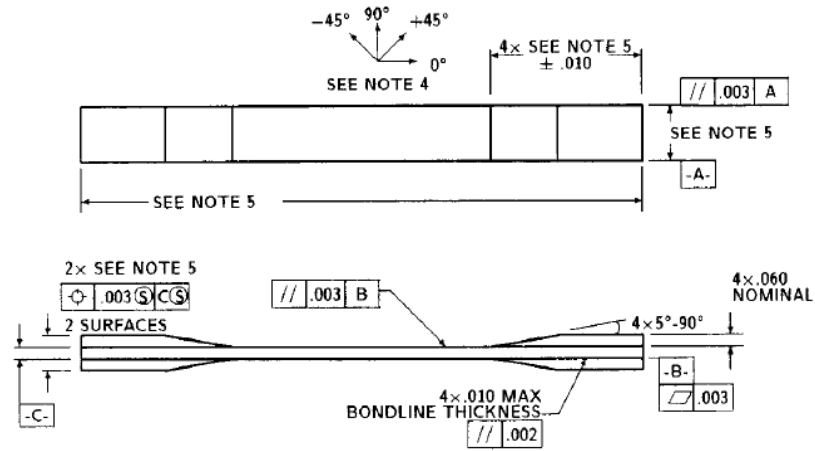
Tabbed tensile specimen, ASTM D3039.
